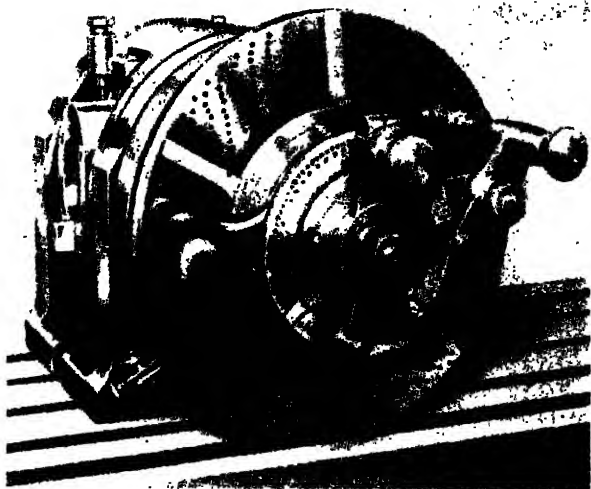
The Cincinnati universal index head with a wide-range divider. (*The Cincinnati Milling Machine Company*)
